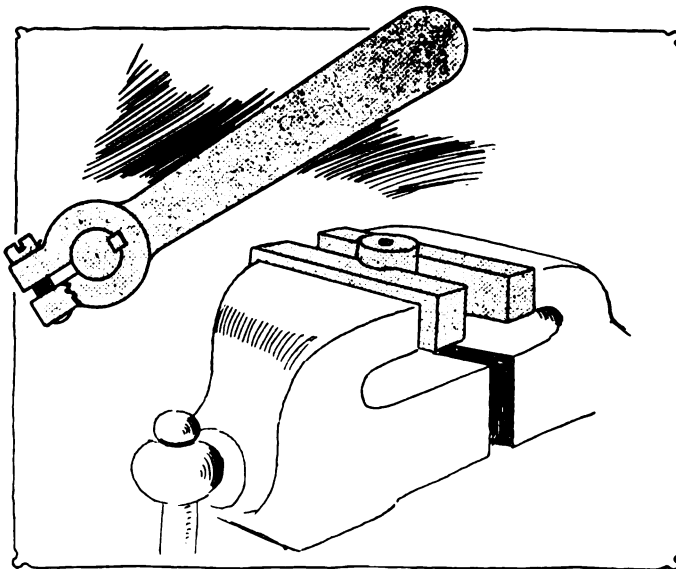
Upper—Clamping a carbureter lever with a split boss and screw. Fig. 2—Lower—Using wooden blocks for holding delicate parts in a vise
